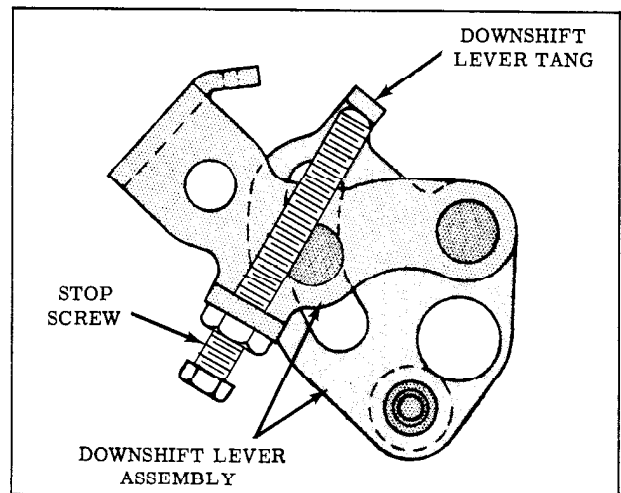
Throttle Downshift Stop Screw Adjustment
